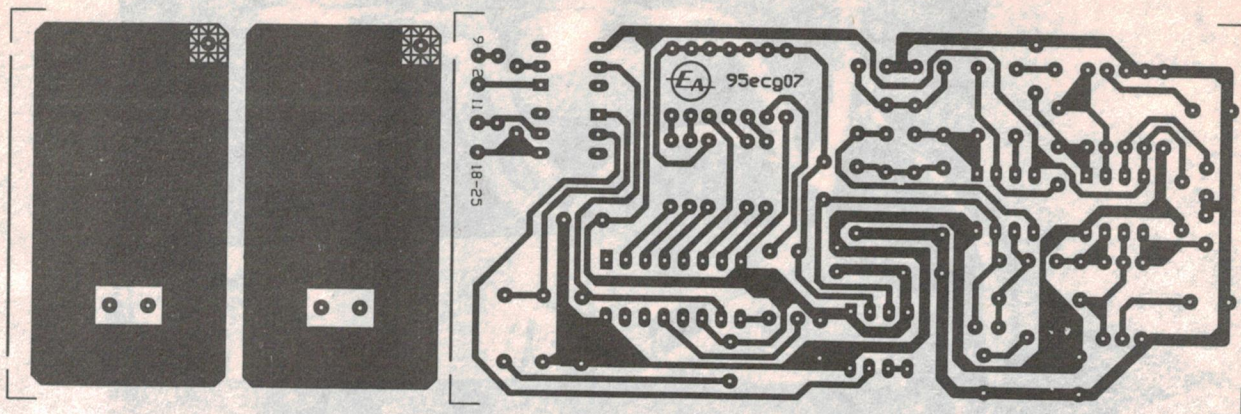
Here's the PCB artwork, full size, in case you want to make your own board. The two large pads on the left hand side get cut off in order to make the electrodes.
